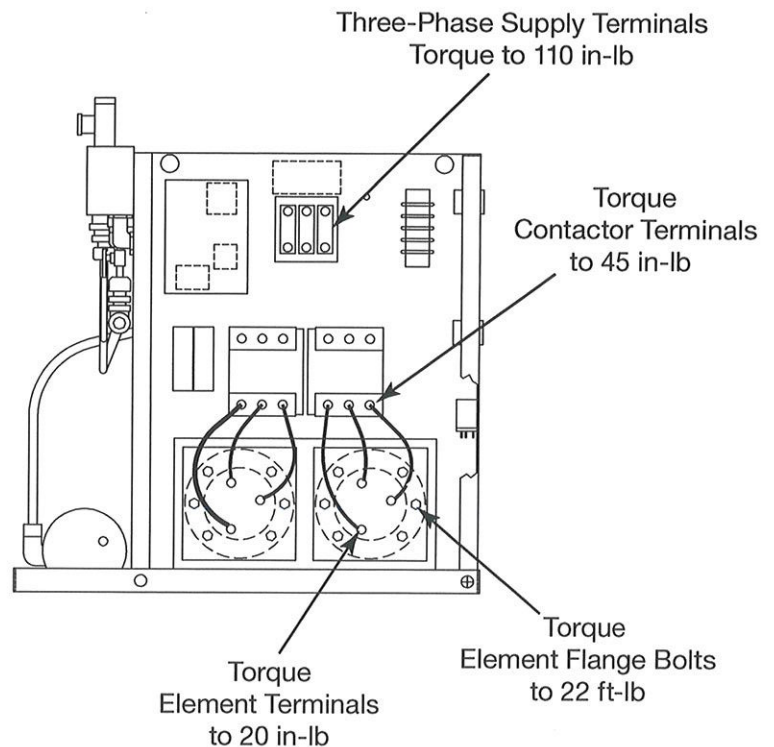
GTS-30A STEAM BOILER TORQUE SPECIFICATIONS
